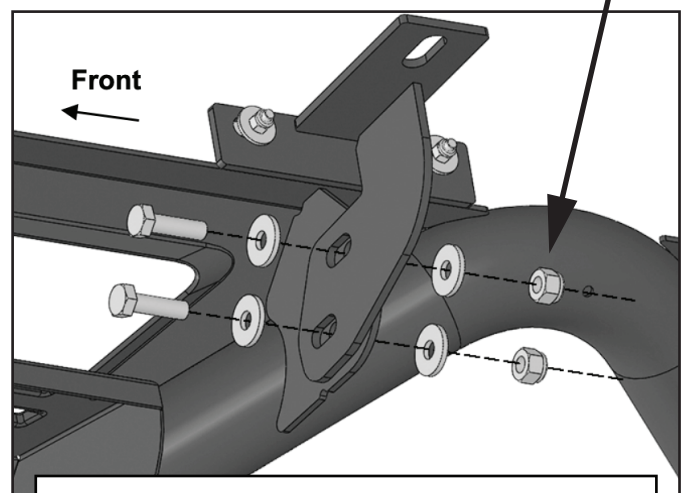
A) Passenger/Right center mounting location (Model without threaded insert shown)
